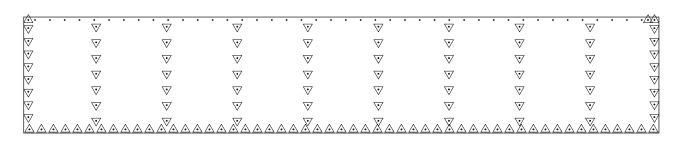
A-1001B-1 TOP SKIN RIVETS
